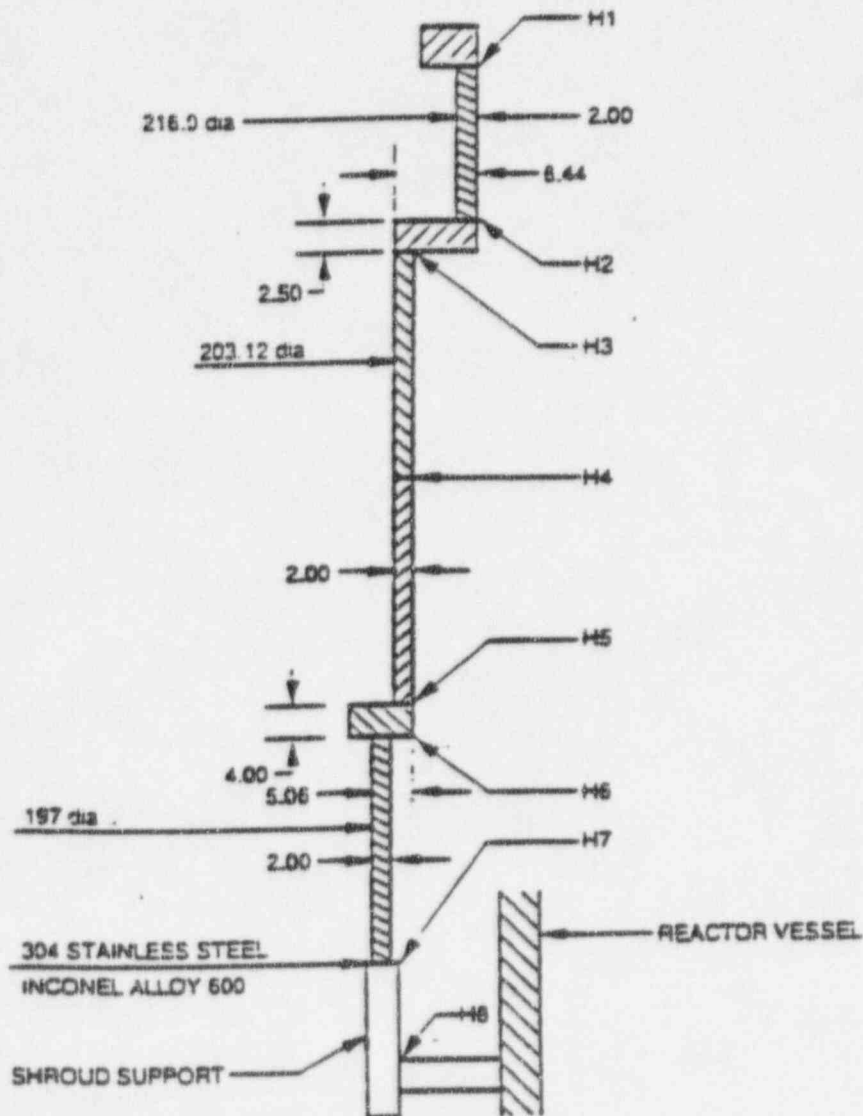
Shroud Horizontal Weld Designations
